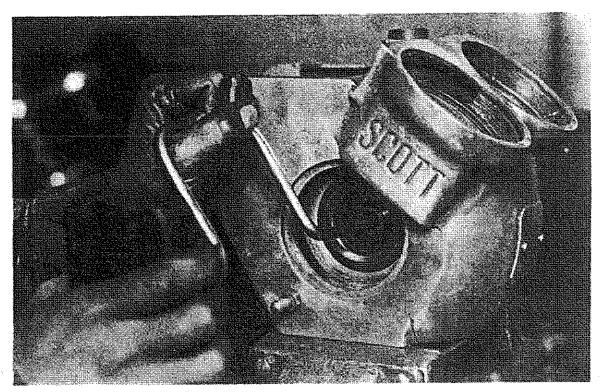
Grinding in Packing Glands on Scott Engine Before Reassembly.
